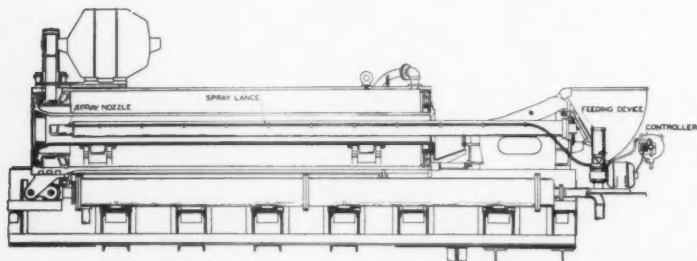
CASTING MACHINE IN POSITION WITH EQUIPMENT NECESSARY FOR COATING THE MAIN BARREL OF THE MOLD.
